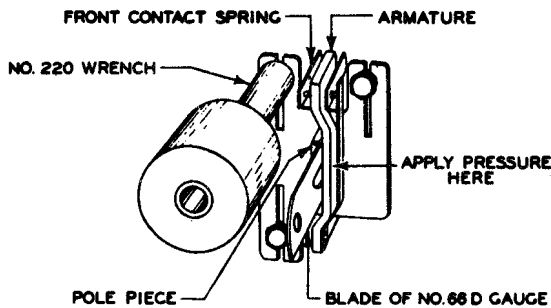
Method of Adjusting For Contact Follow and Contact Separation
